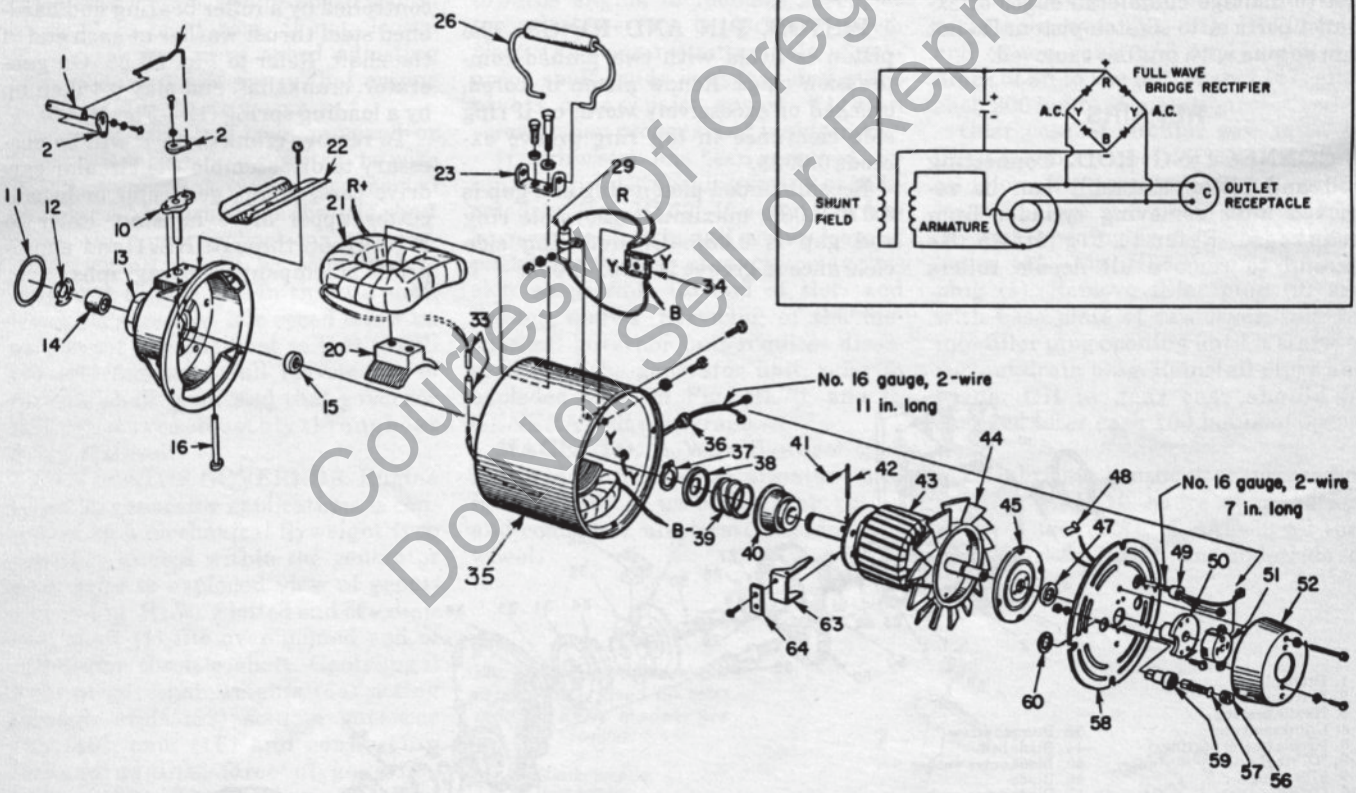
Exploded view of generator assembly. Wiring diagram for generator is shown in upper right corner. Crankshaft needle roller (main) bearing (14) and crankshaft seal (15) are carried in bearing housing (13). Armature (43) must be unscrewed from engine crankshaft to allow removal of bearing housing and crankshaft.
